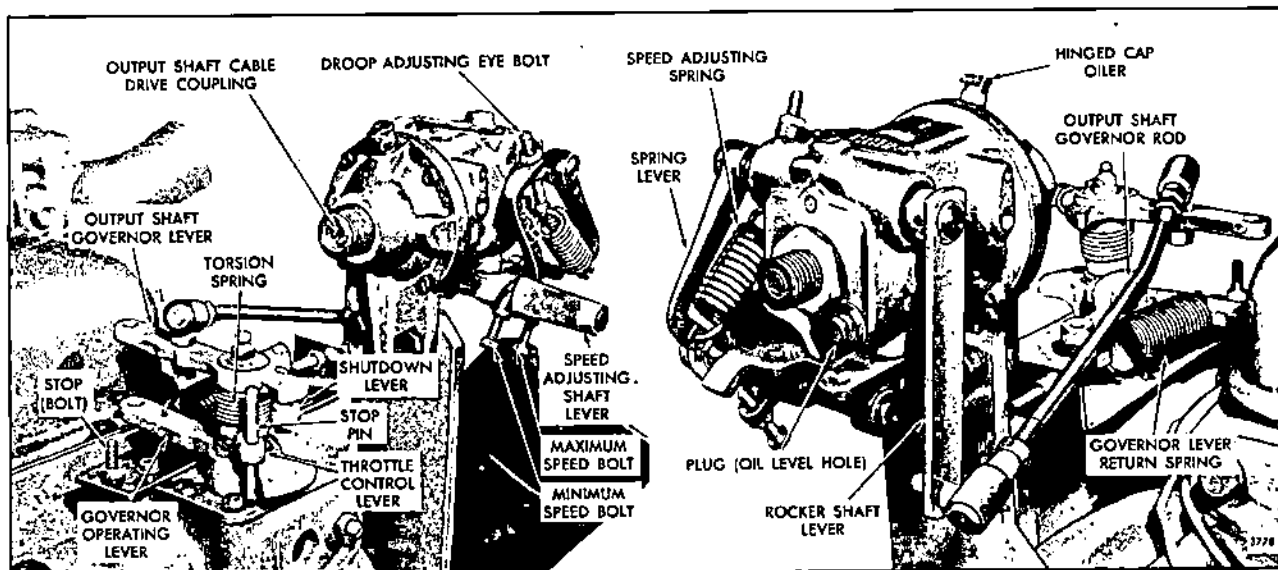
Flexible Shaft Driven Output Shaft Governor and Linkage
